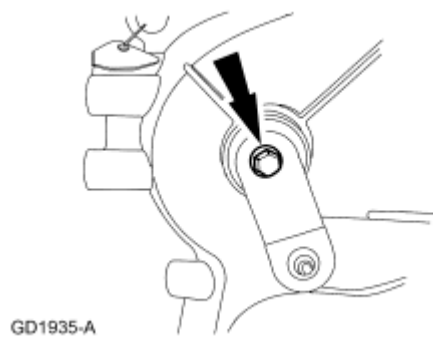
Manual Control Lever Outer Assembly & Bolt
